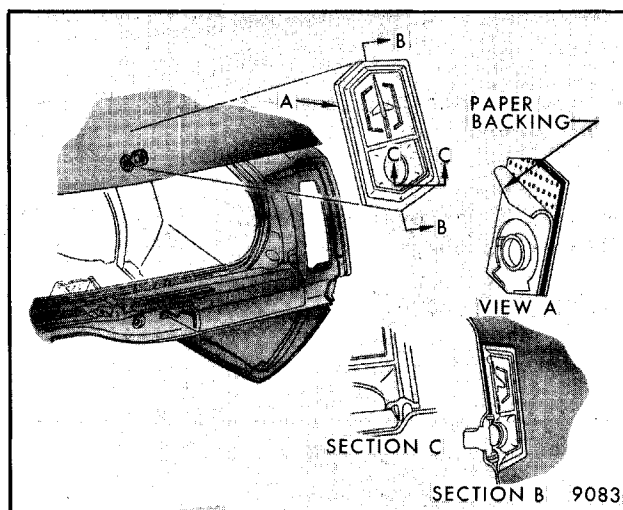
Oldsmobile Adhesive Backed Lock Cylinder Emblem
